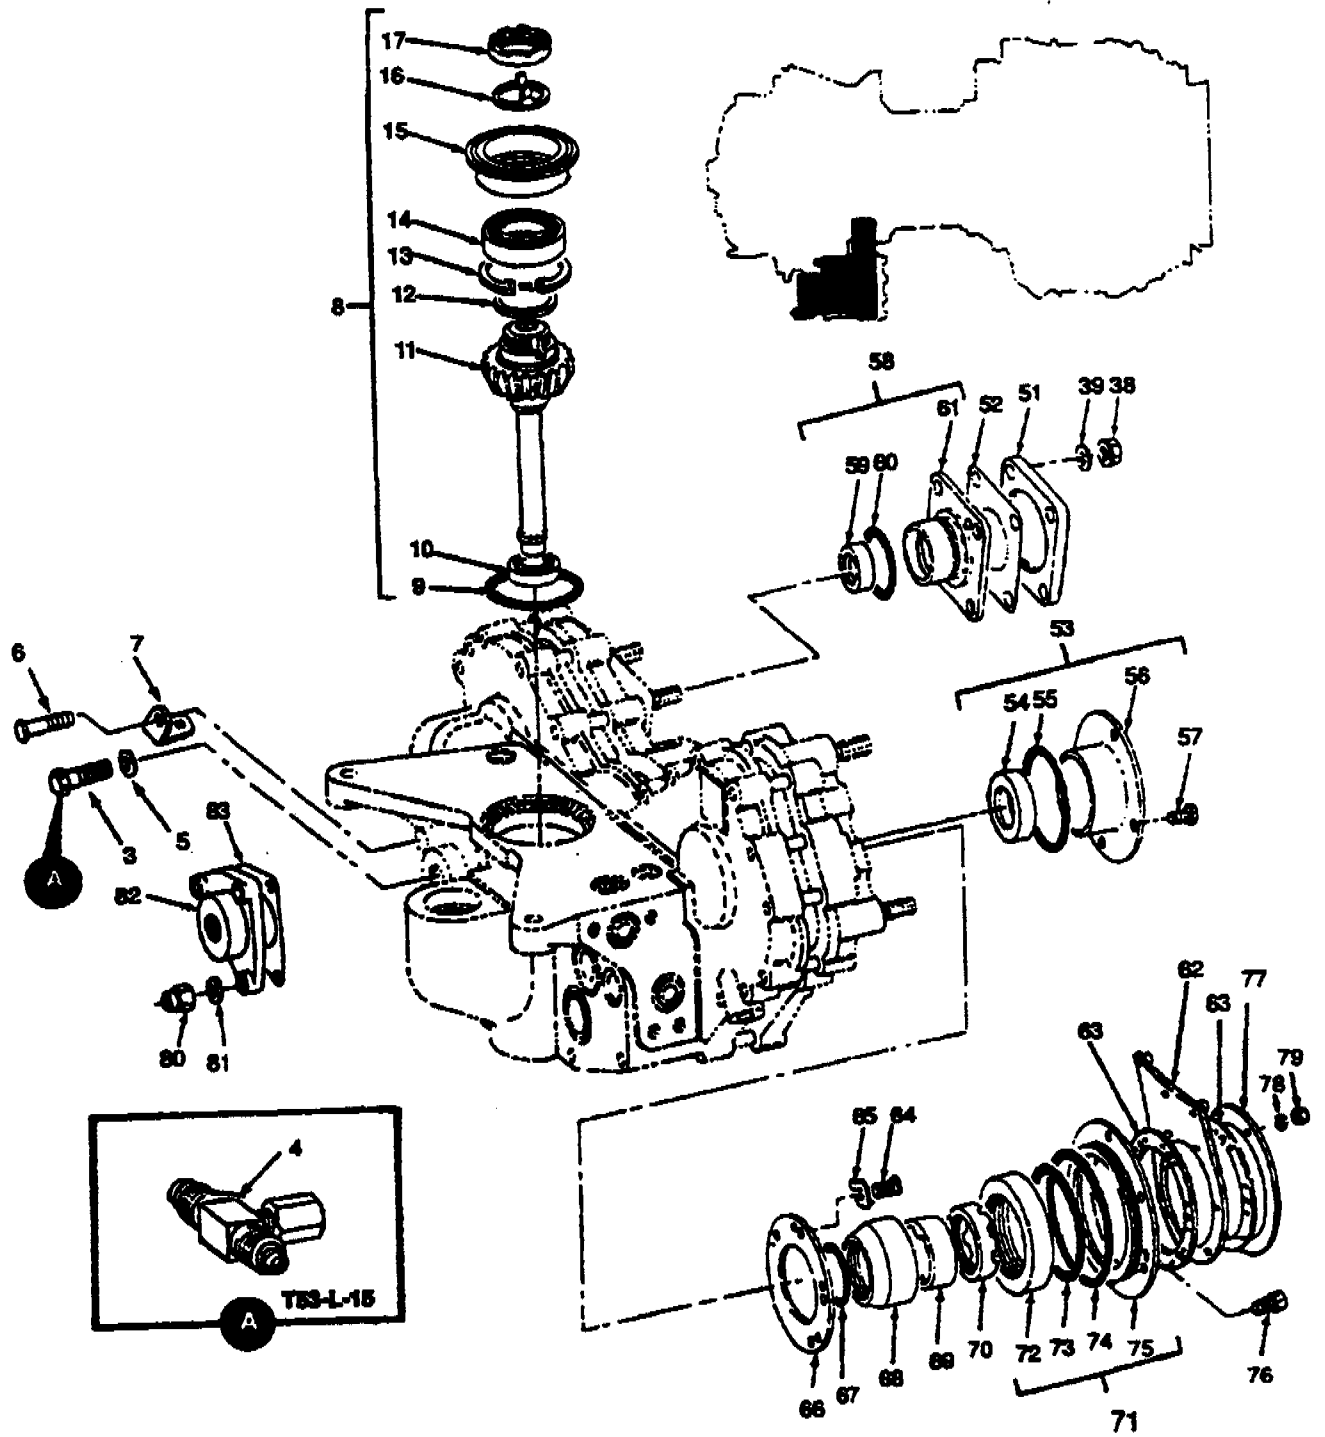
Accessory Drive Gearbox (Sheet 1 of 2).
